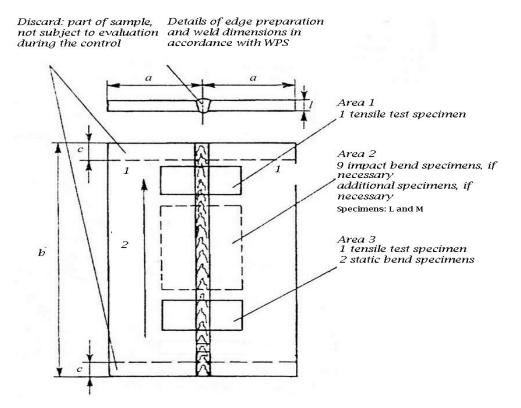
Test assembly of welded butt joint and the diagram of test specimens' cutting-out:
